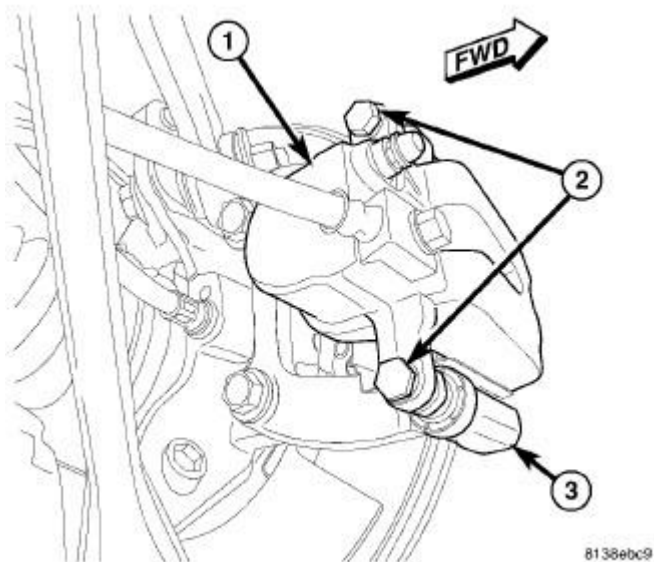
Rear Brake Caliper, Adapter & Guide Pin Bolts
